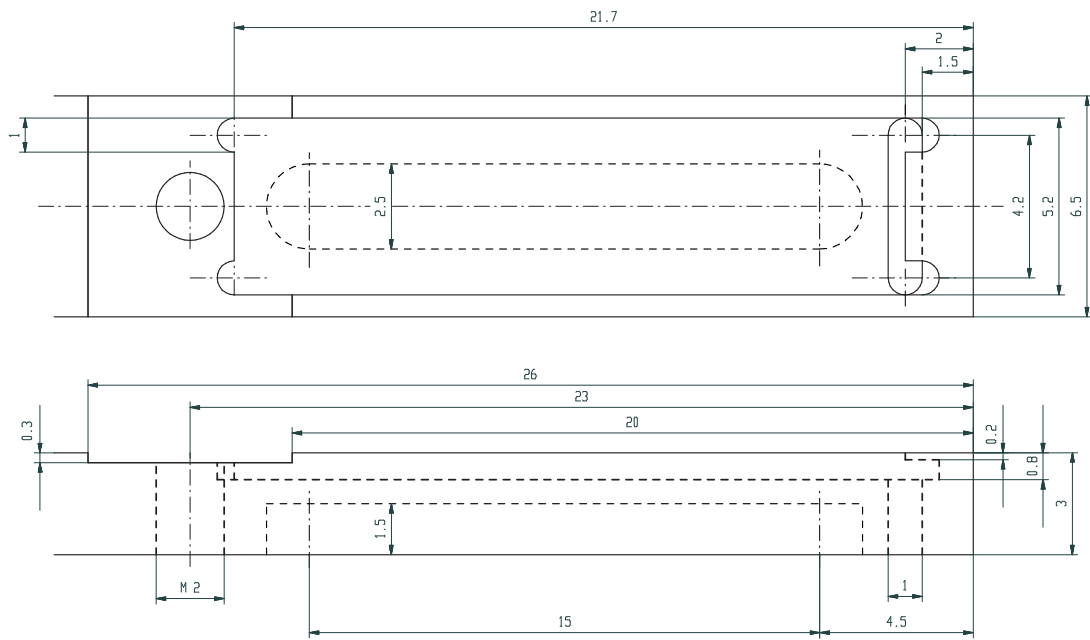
Detailed drawing of the top side of the front part of the sample holder
